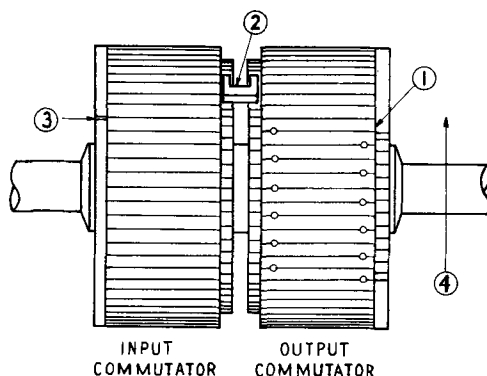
Commutator and shaft assembly. 1—Index bar; 2—connecting strap; 3—segment separation point; 4—direction of rotation.
